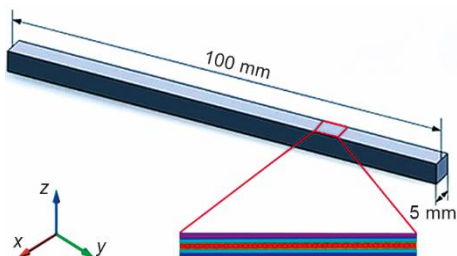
The 3-D CAD image of test specimen and its infill pattern
